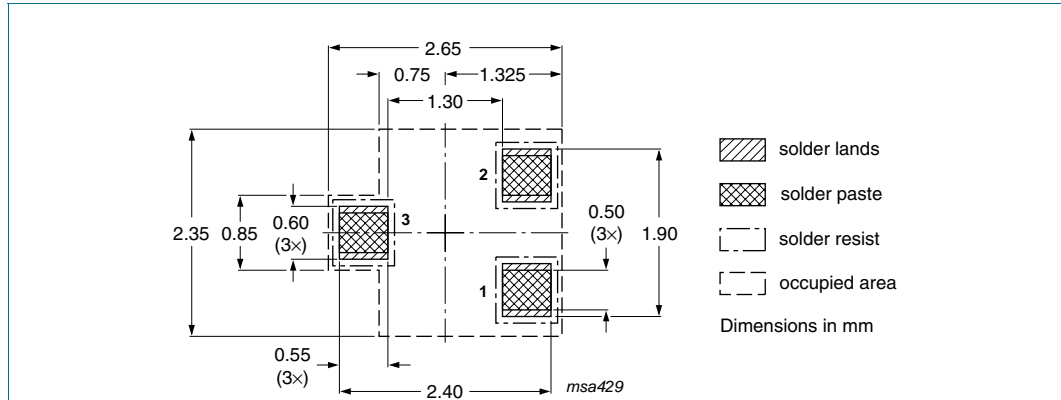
Reflow soldering footprint SOT323 (SC-70)
